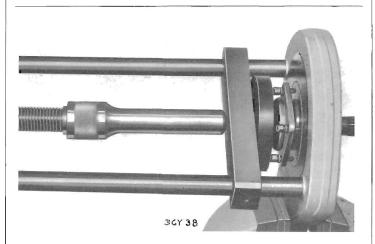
Pressing the inner axle shaft through the bearing and housing
